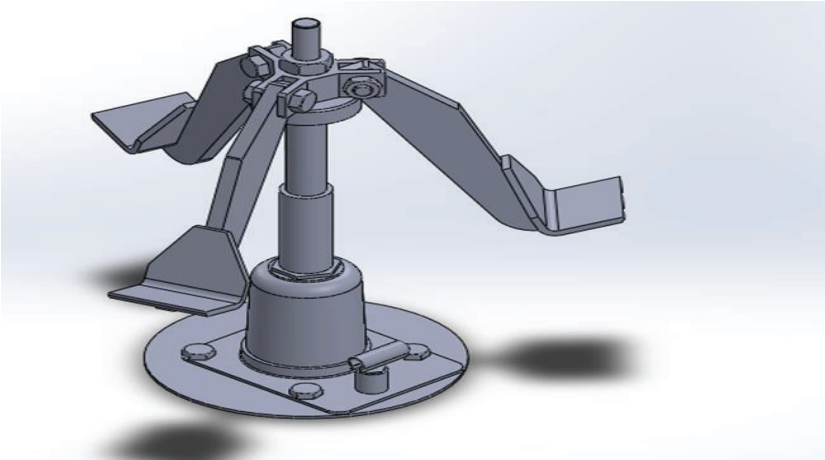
A Design of 3 Piece Run Flat Mobile Tire Changer for 22.5” Rims
